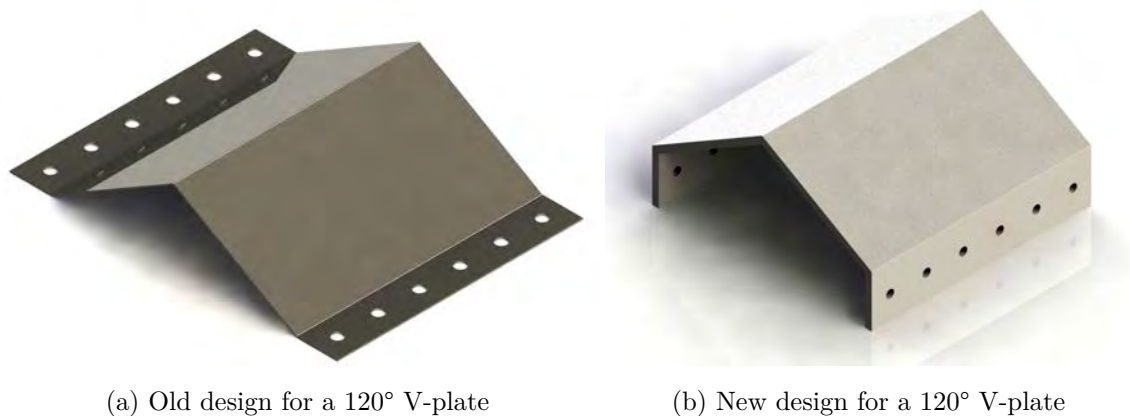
3D CAD models of the V-plates tested by Pickering [6] and Hobson [8]
